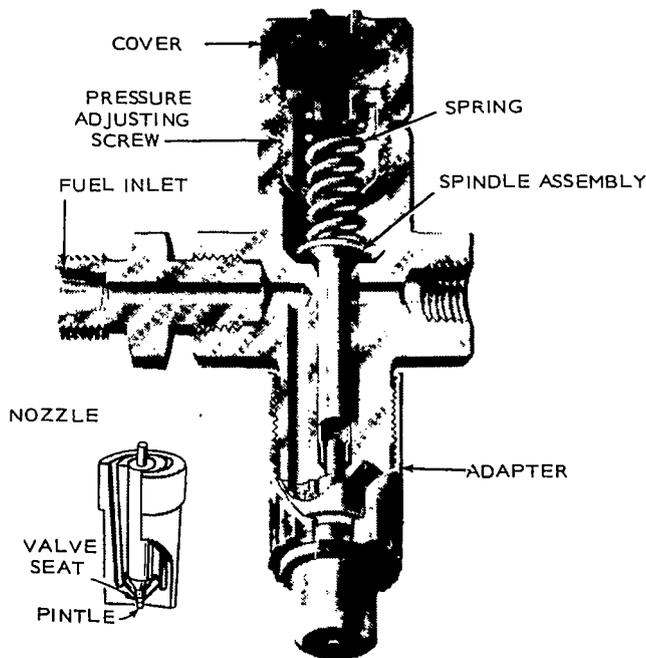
INJECTOR NOZZLE AND HOLDER ASSEMBLY
